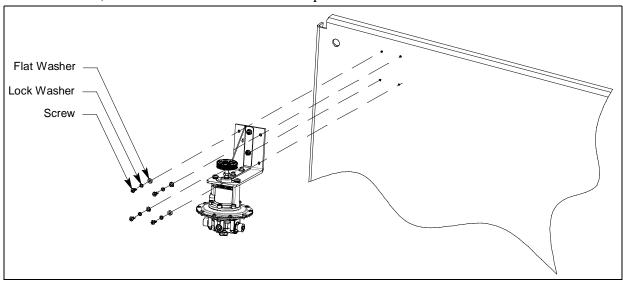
Reinstalling Sample Regulator/Bracket Assembly to Mounting Plate
